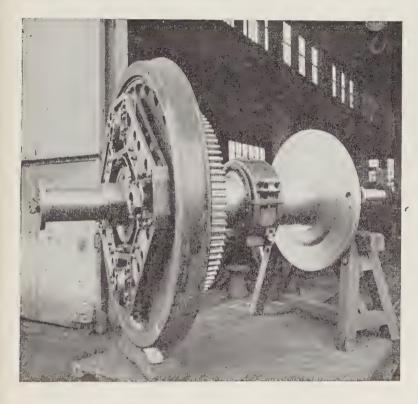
View of the axle of fig. 357 (right - hand side) the opposite wheel and mechanism being removed. At the end of the hollow shaft can be seen the disc bearing on its outer face the same driving pivots as on the gear wheel (fig. 357, left). In the centre of the hollow shaft is the housing of the worm-operated drive for the oil pump.
